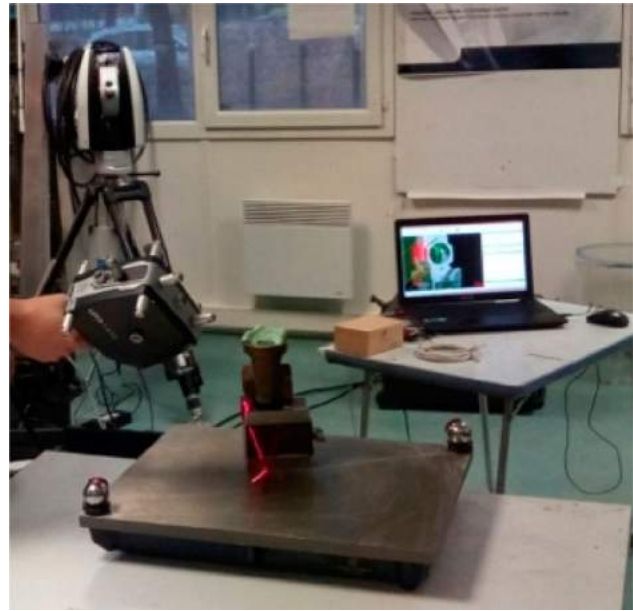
Hand-held laser scanner Leica T-Scan 5 used for scanning test assemblies.
